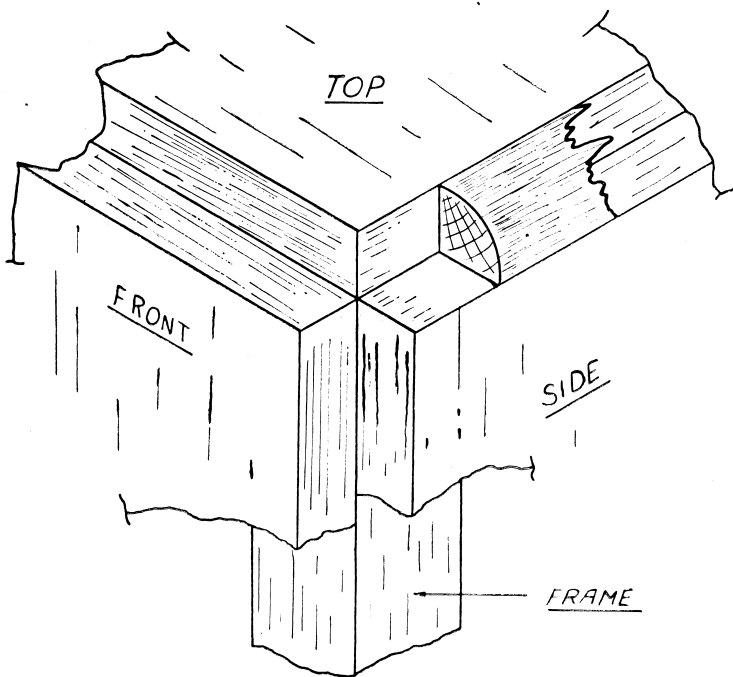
Sketch showing method of using "quad" moulding to provide a finish to the front and side faces of the vented enclosure cabinet.
